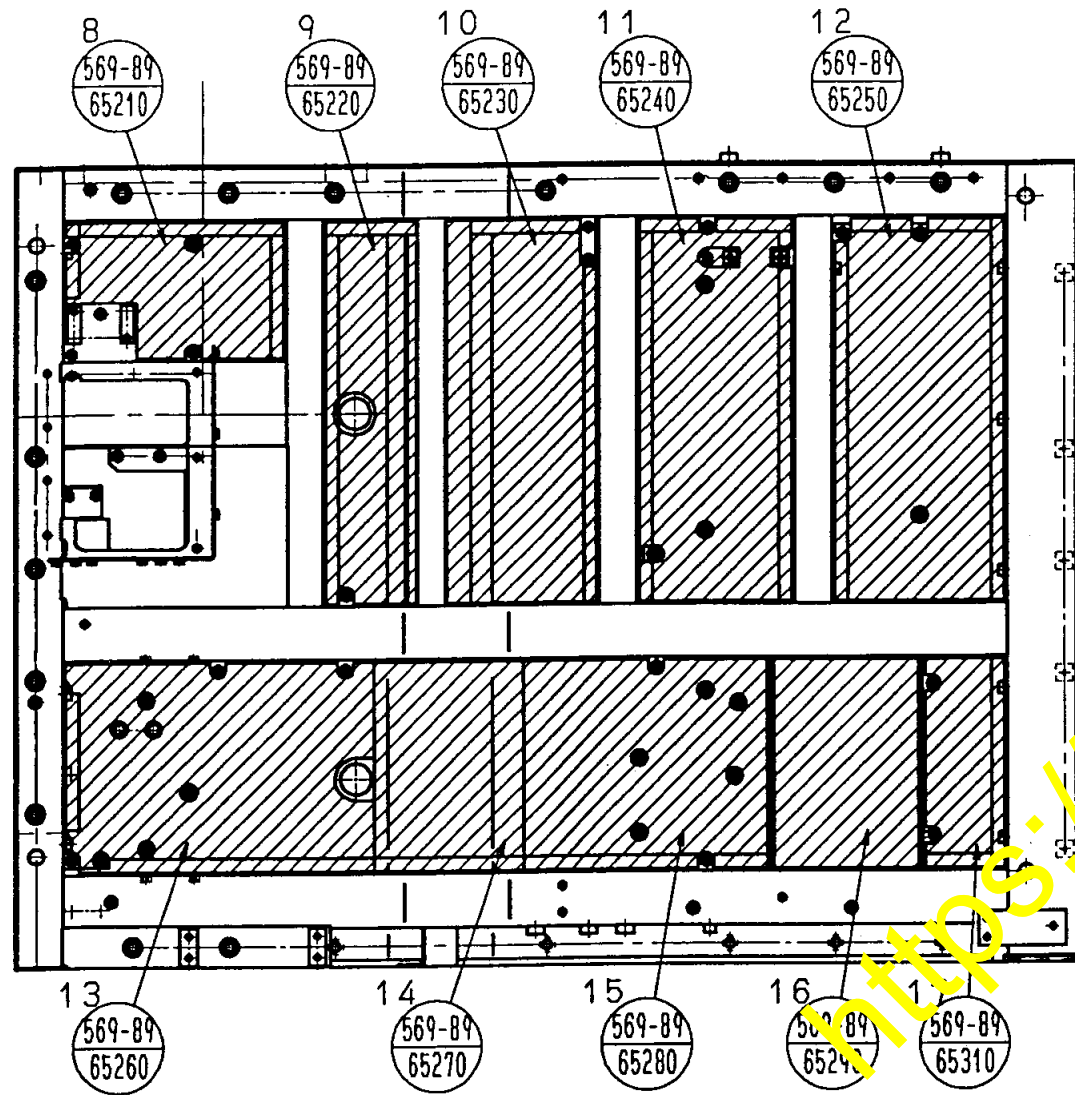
(Drawing for installation of the dampers: The above drawing is a bottom view, when looked up from underneath.)
